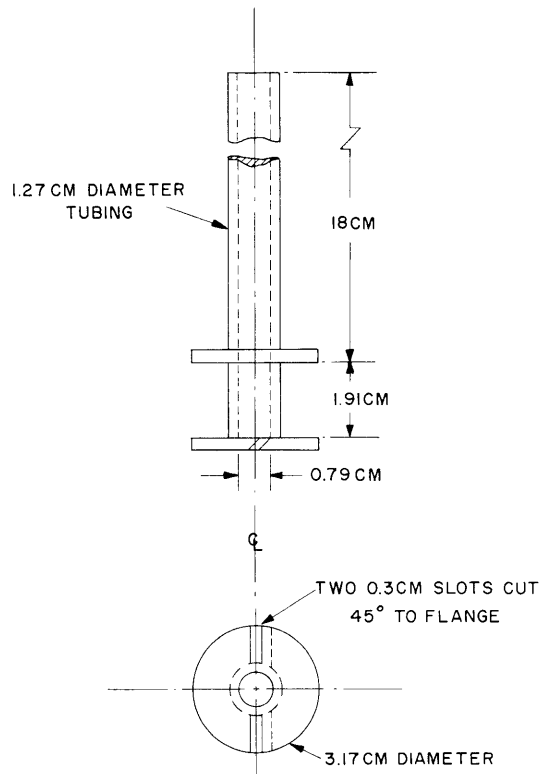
304 stainless-steel spool and support tube for small coils.
